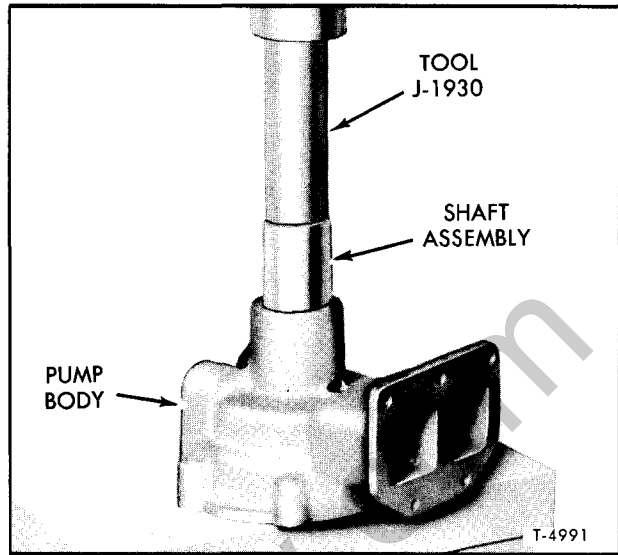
Pressing Shaft Assembly into Water Pump with Special Tool (J-1930)
